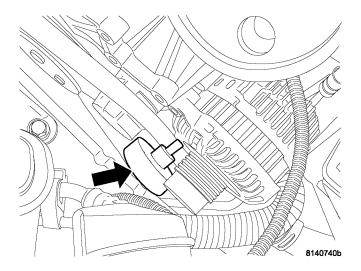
UPPER MOUNTING BOLT(3) Loose install upper mounting bolt (Fig. 23).
